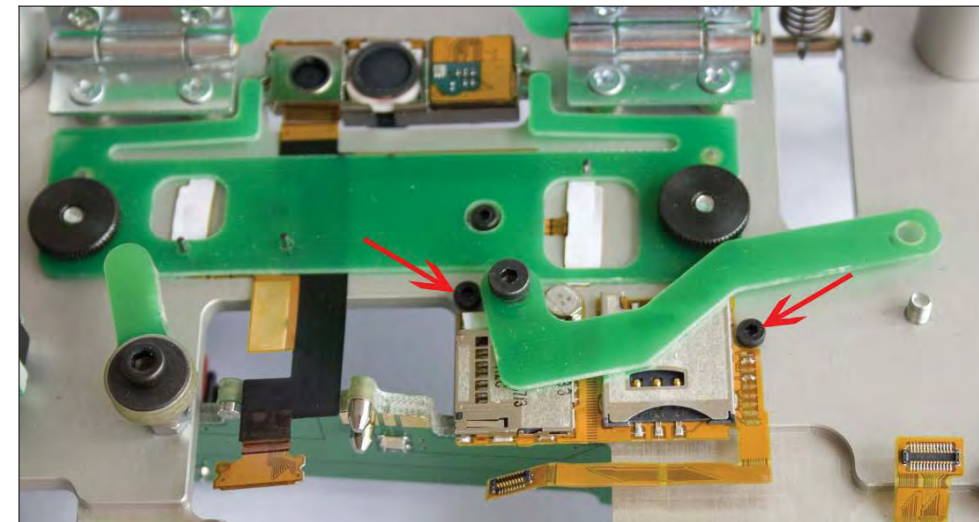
Insert the SIM/M2 flex module by sliding it into position under the green card holder. The red arrows points at the flat nuts that mark the end position for the SIM/M2 flex module.
